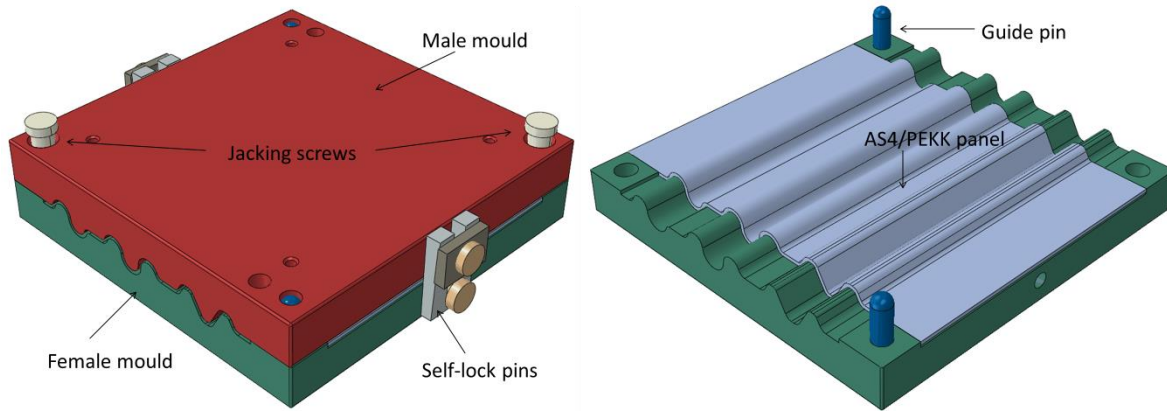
Moulding tool for the manufacture of AS4/PEKK corrugated panels.
